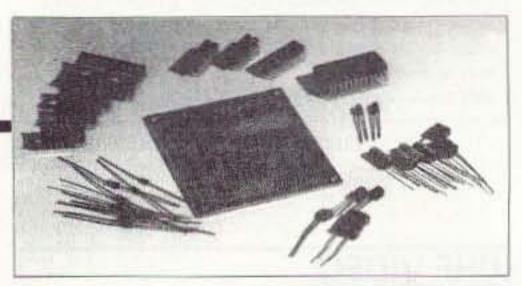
Photo A. The Hamtronics TD-4 board and components awaiting assembly.
